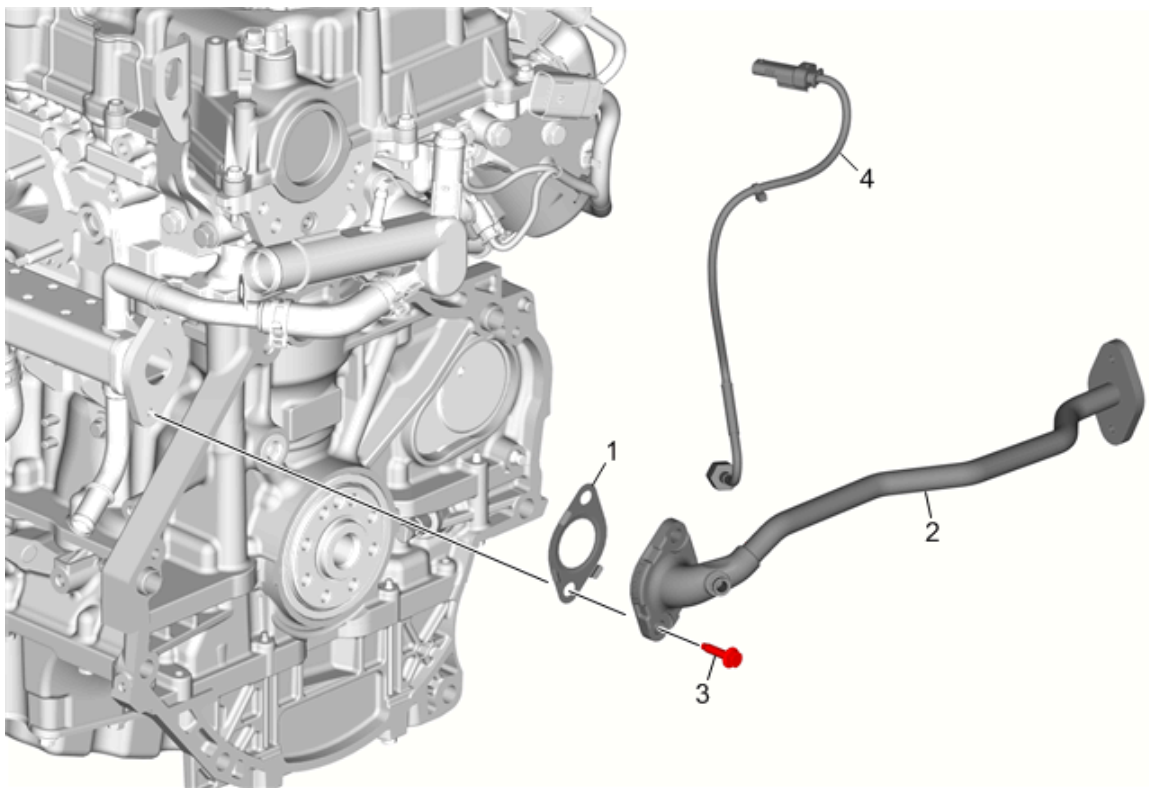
Exhaust Gas Recirculation Cooler Outlet Pipe
